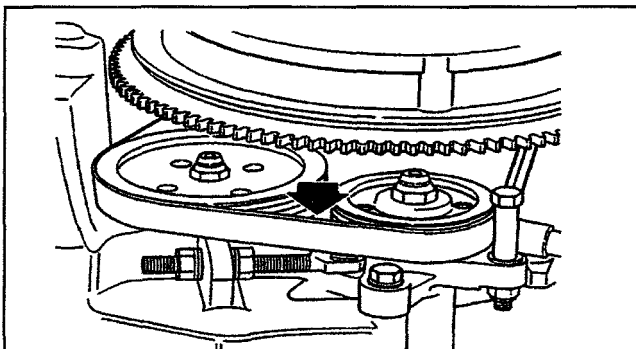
Check the power steering pump belt frequently-tension is adjusted by the threaded rod visible just underneath the belt in the illustration
